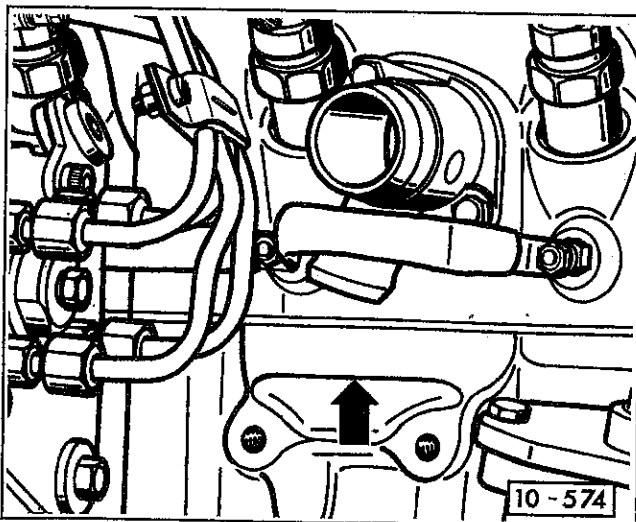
Engine number location (arrow) on AAZ diesel engine shown. AHU diesel is similar.
